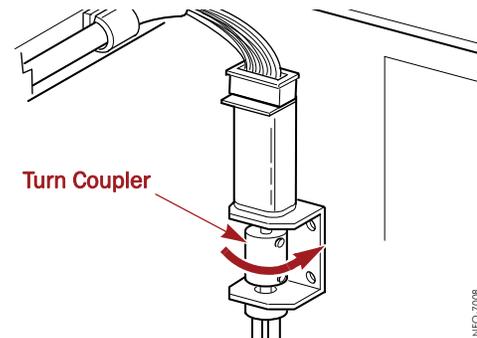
Turn Front Z-Axis Motor Coupler (Inside View)
